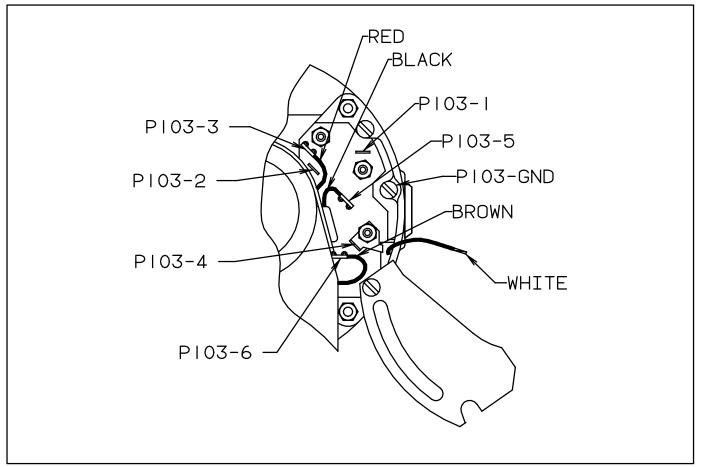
FUEL TRANSFER PUMP MOTOR CONNECTIONS
